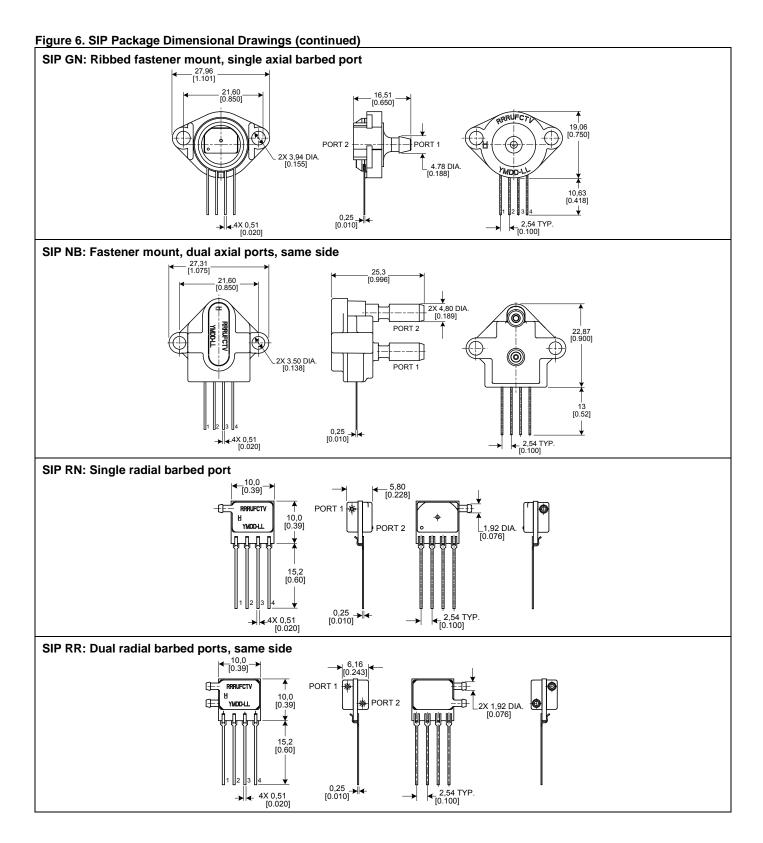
SIP Package Dimensional Drawings (For reference only: mm [in])
